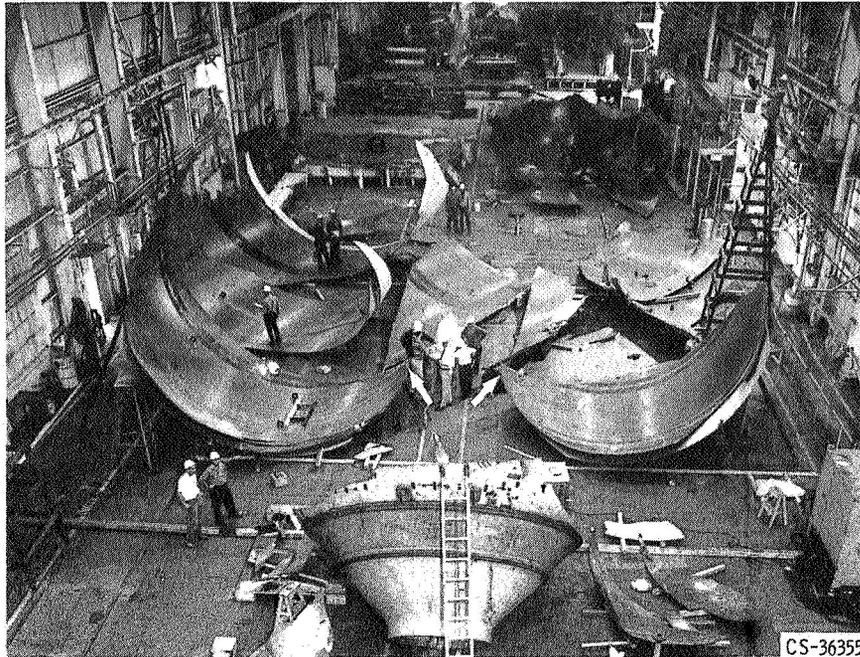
260-Inch-diameter rocket casing after failure during hydraulic proof testing. Arrows indicate weld flaw which caused failure.
